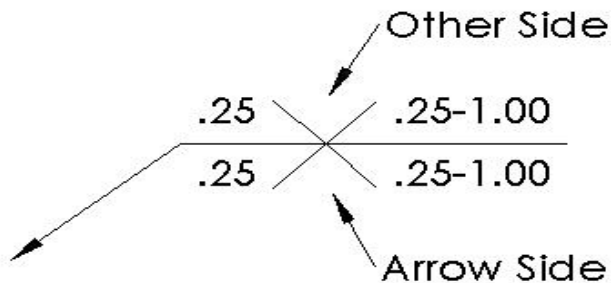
Shows which side of the weld symbol should have the information based on where the weld is located.
